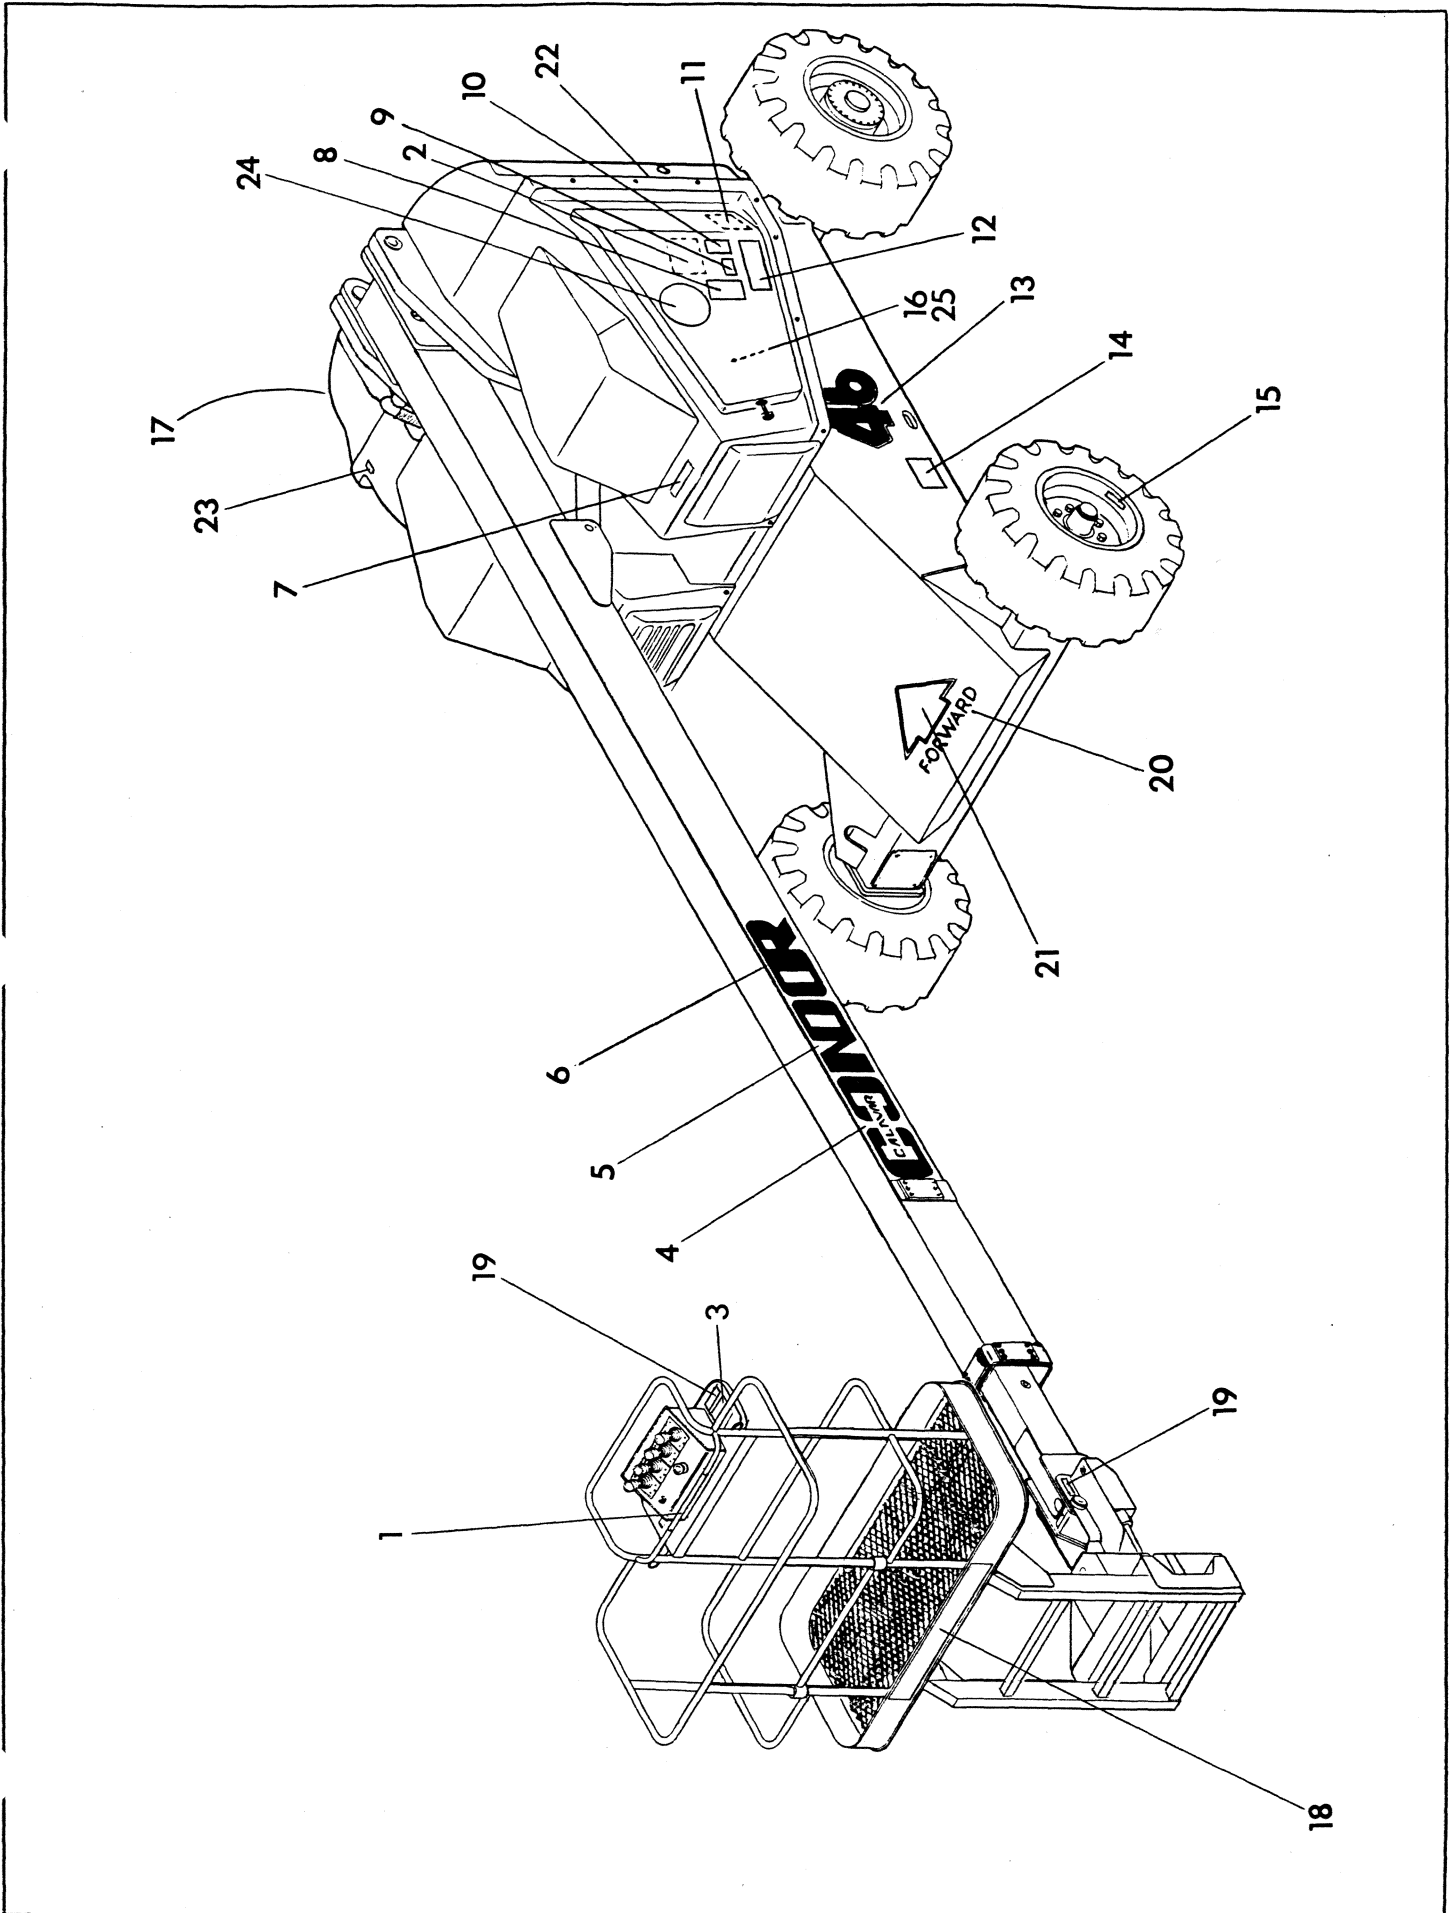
FINAL ASSEMBLY (2-Section Boom)
